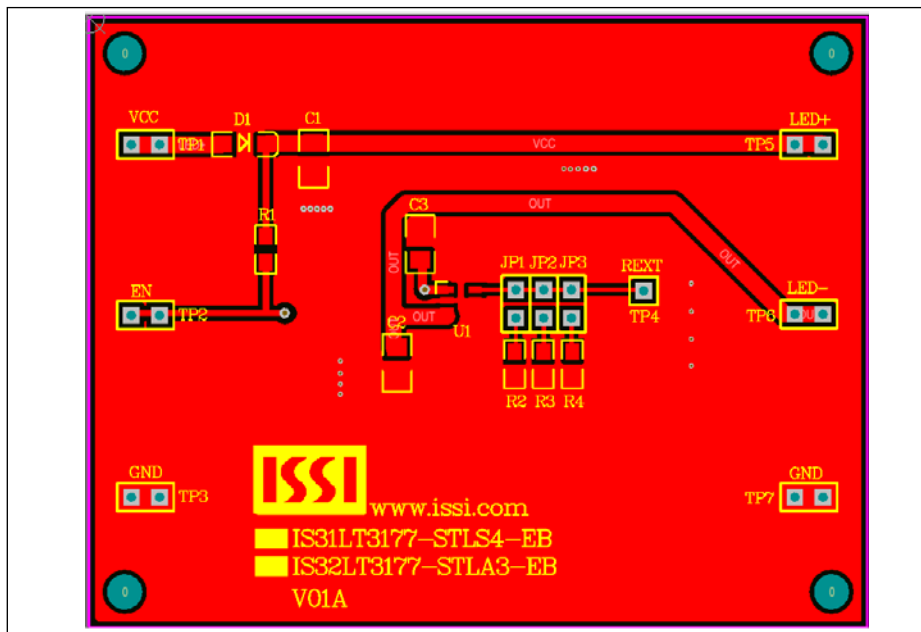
Board PCB Layout - Top Layer (SOT23-6)
